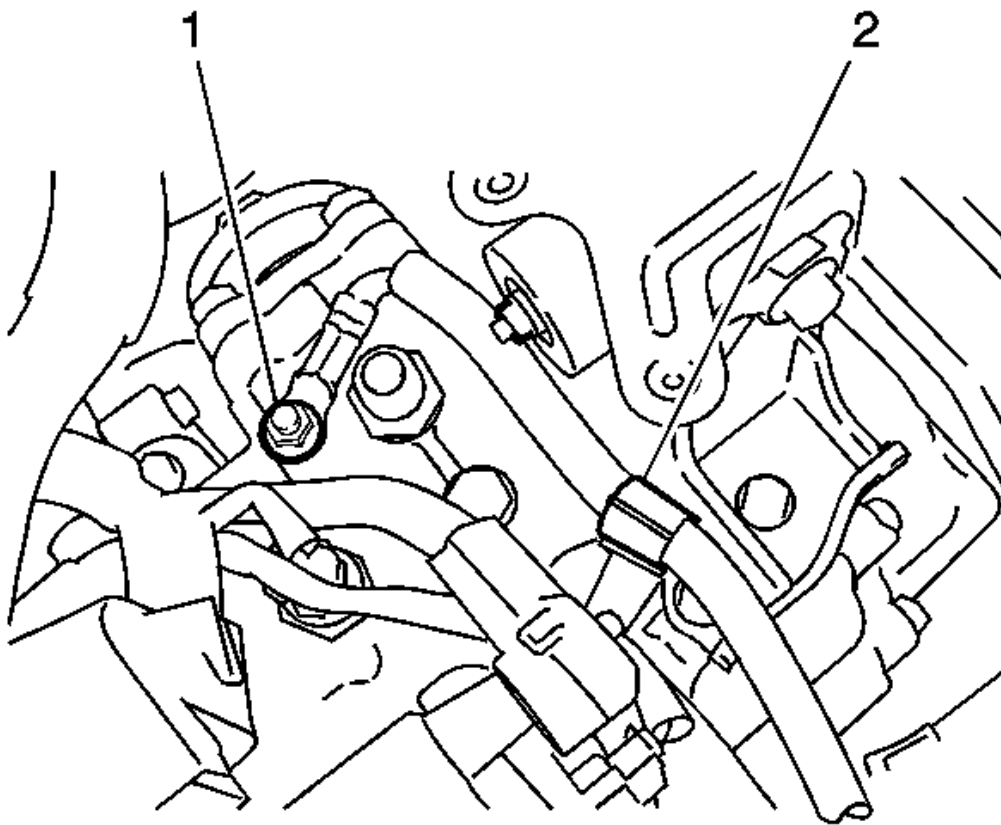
Identifying Clamp & Ground Cable - Manual Transaxle
